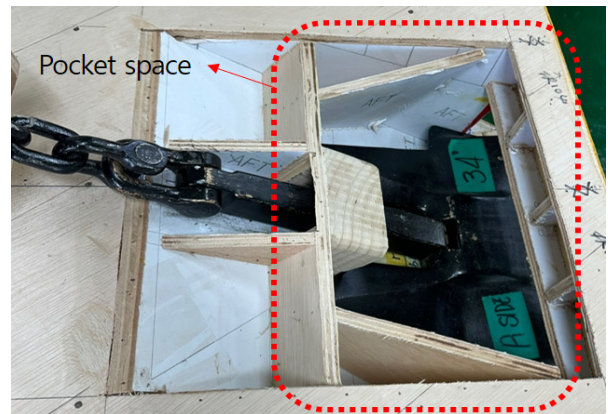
Assembly of the bow section mock up with a semi-pocket type anchoring system applied
